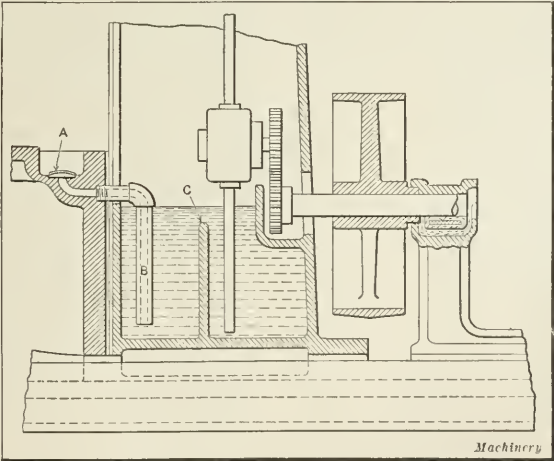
Partial Sectional View of Frame of Drilling Machine built by Sibley Machine Tool Co., showing Lubricant Arrangement of
